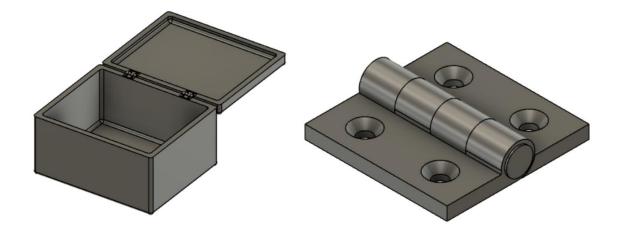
Outer casing assembly of lid and body (left) and hinge (right)
